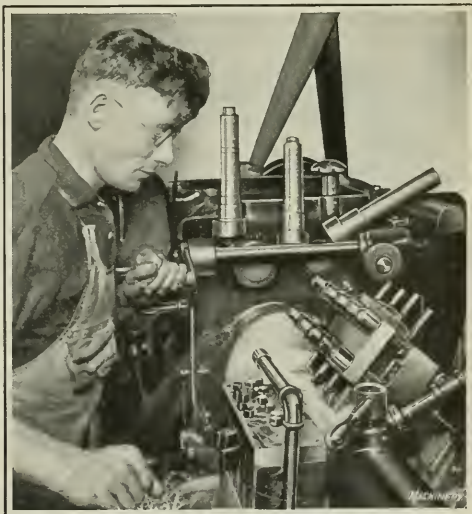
Coolant being supplied copiously on a Machine equipped with Intensive Tooling
